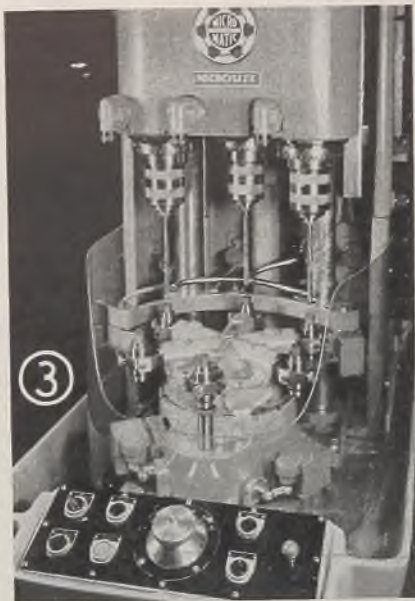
Three-spindle hydraulic production honing machine with six-station indexing table. As table indexes, bushings move under rough, semifinish and finish honing spindles in sequence
